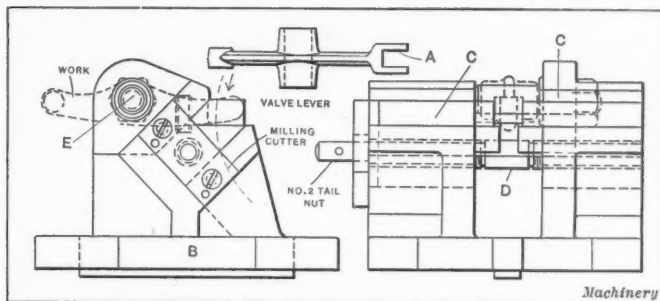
Milling Fixture for slotting Inlet Valve Lever
